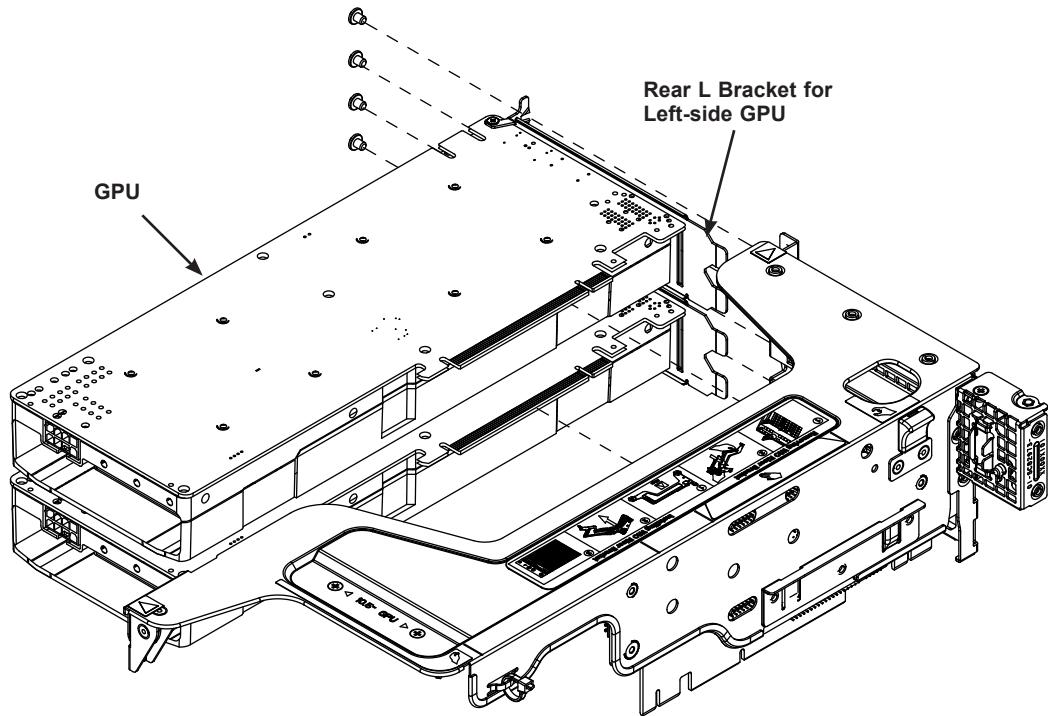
Inserting the Left-side GPUs into the Riser Card Bracket
